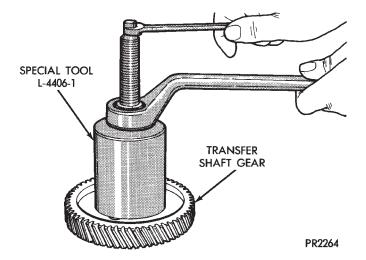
Using Tool L-4406-1 with Adapter L-4406-3, Remove Transfer Shaft Gear Bearing Cone
